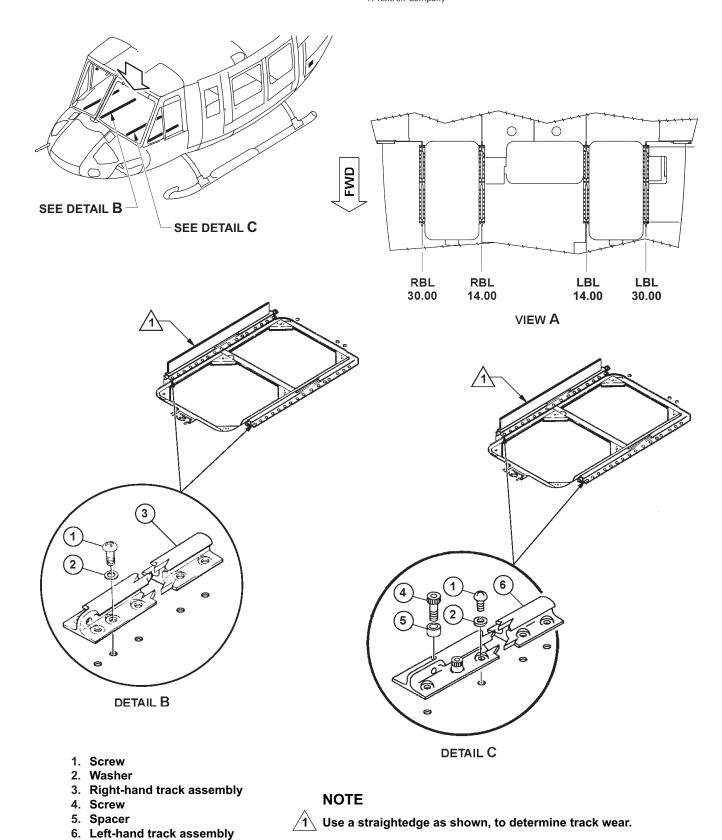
Crew Seat Track Assemblies — Removal and Installation
